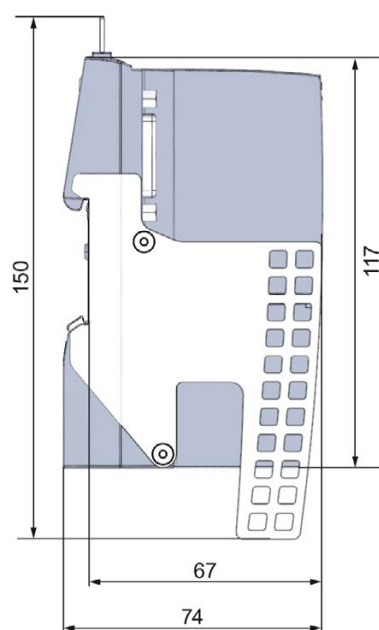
Dimension drawing of CPU 1515SP PC, side view
